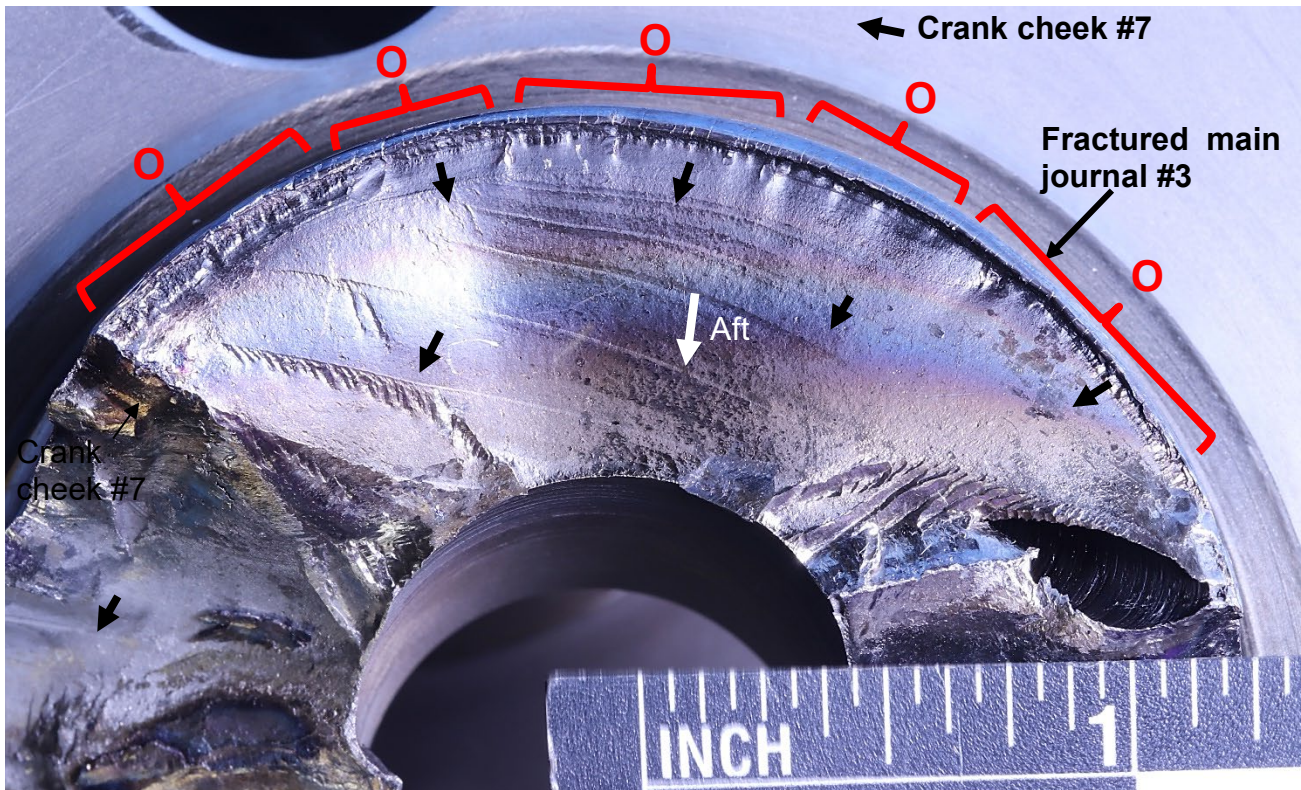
Close-up photograph of the aft fracture face of main journal #3 showing fatigue crack origin area indicated by brackets "O" and general direction of fatigue crack propagation.
